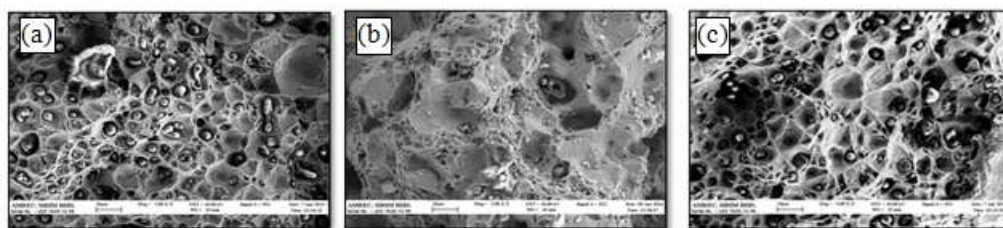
Fracture surface as sintered of (a) F1, (b) F2 and (c) F3.
